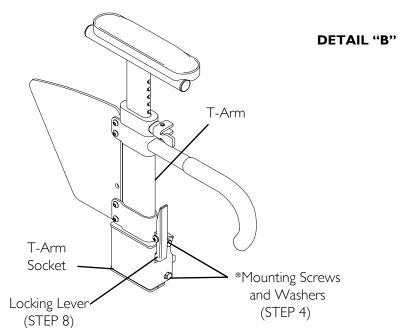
Adjusting the T-Arms - Adjusting T-Arm Sockets
